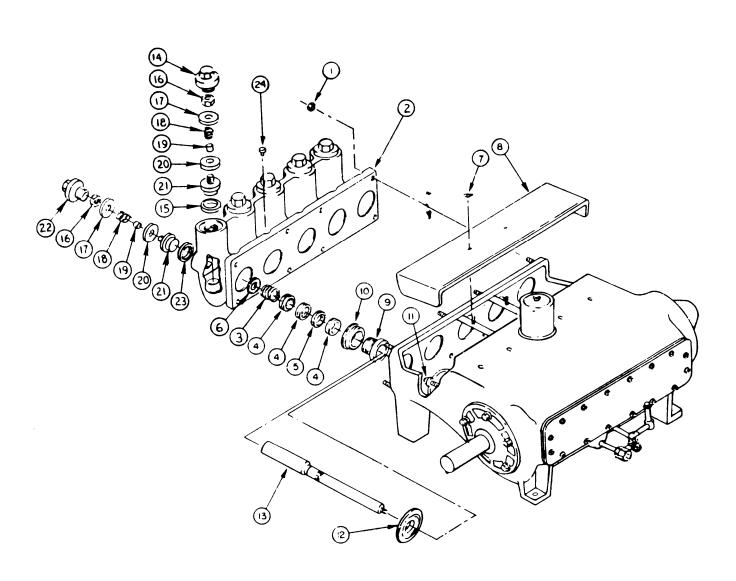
R.O. Pump Suction/Discharge Assembly
